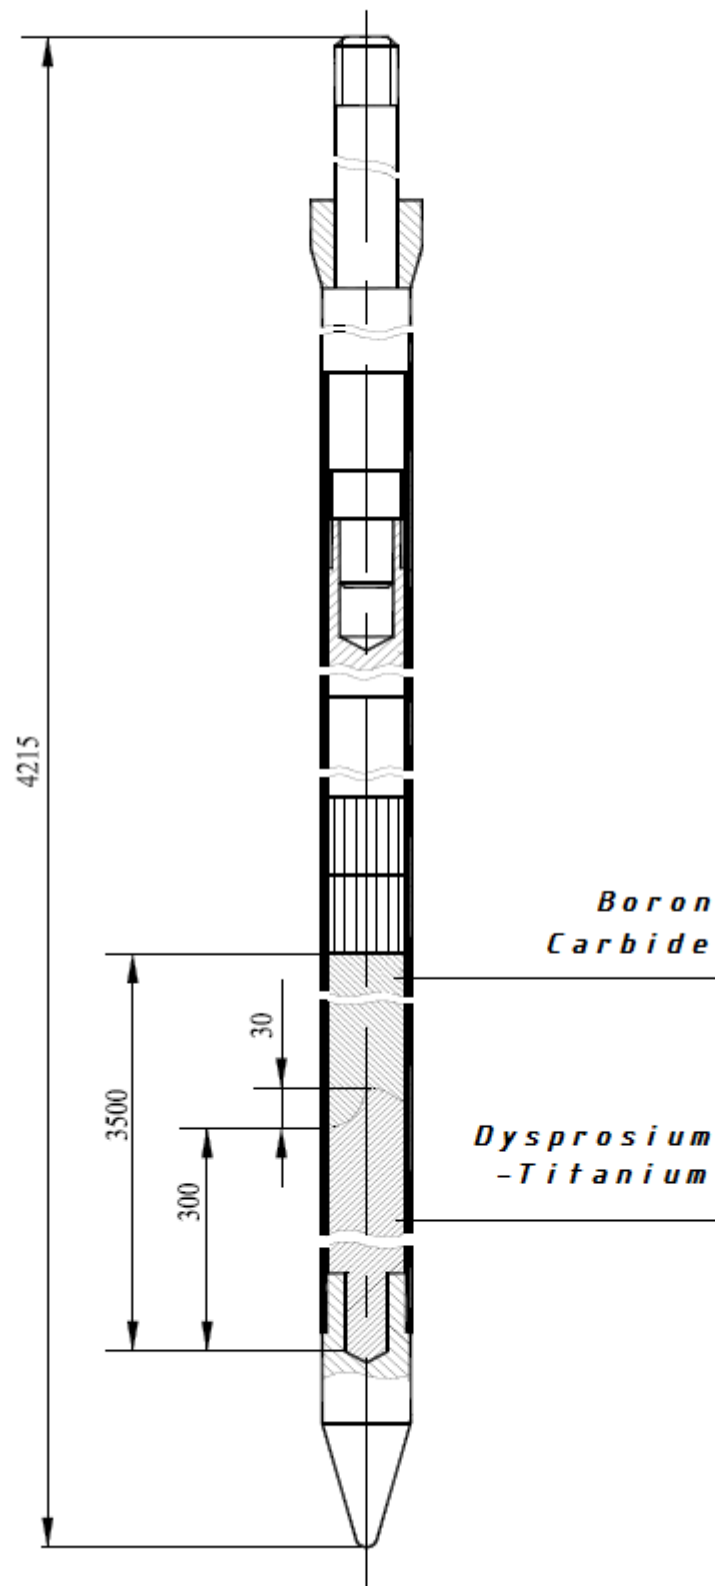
Vertical cross section of an absorber element (dimensions in mm).
